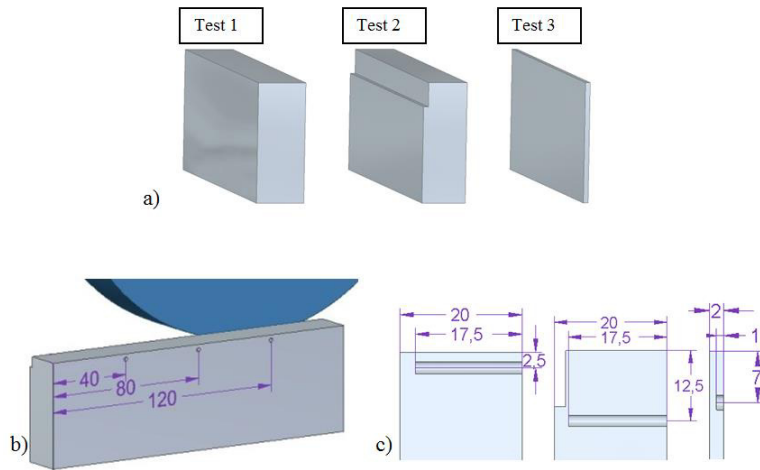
(a) workpieces geometries before being ground; (b) thermocouples position on the workpiece; (c) depth of the holes for the thermocouples in a ground workpiece
